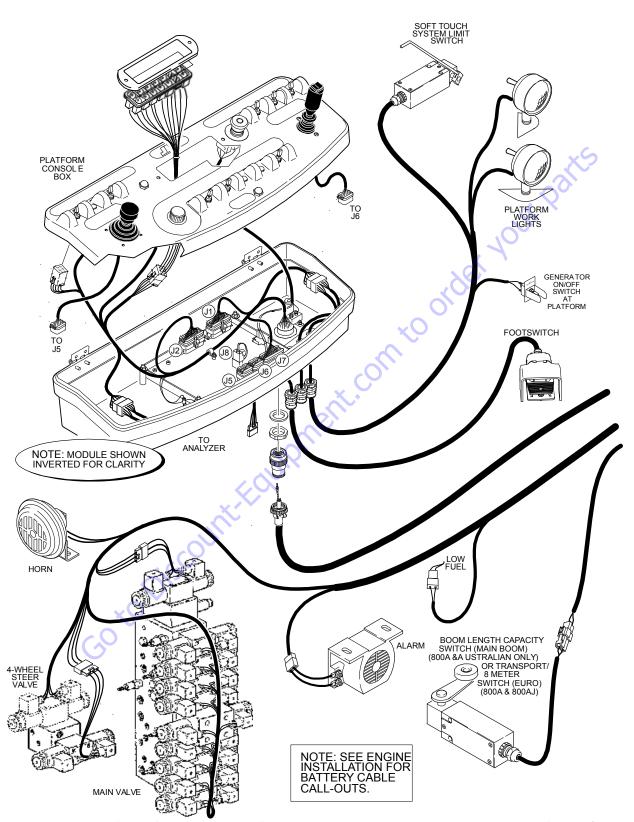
Electrical Components Installation w/ADE (S/N 0300064432 to S/N 0300069000) - Sheet 1 of 2
